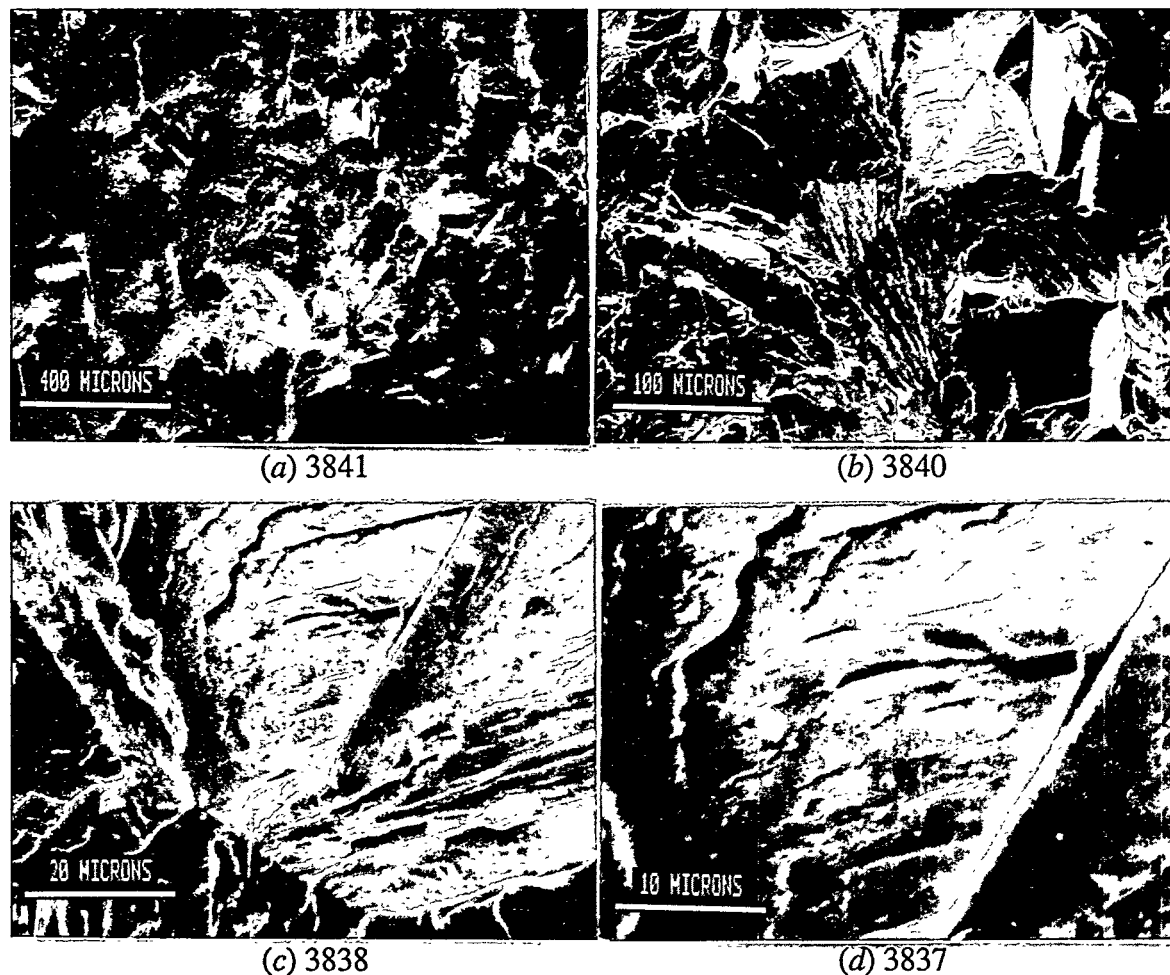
Fracture surface details of room-temperature tensile-tested specimens from air-melted and extruded bar of FAPY: (a) 50 \times , (b) 200 \times , (c) 1000 \times , and (d) 2000 \times .
